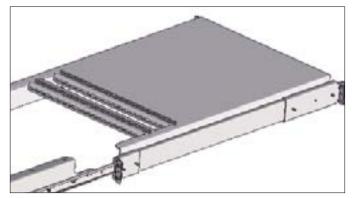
Figure B. The slots on the instrument brackets are designed to accept a strap should you want to secure your chassis.
